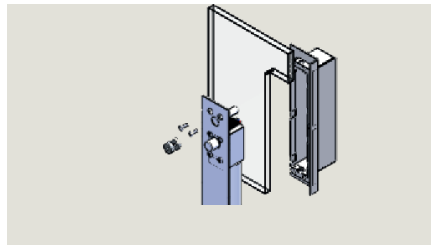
DK3305-02G Electric bolt lock kit w/ jamb prep
